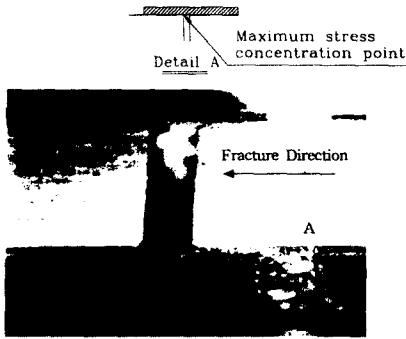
Macroscopic appearance of fractured shear delamination and Al/AFRP failure in APAL shear strength test specimen
